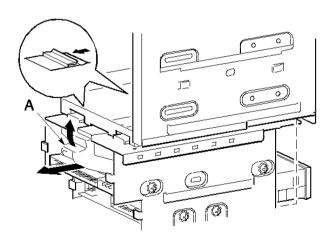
9 Removing the Lower Drive Bay Assembly
